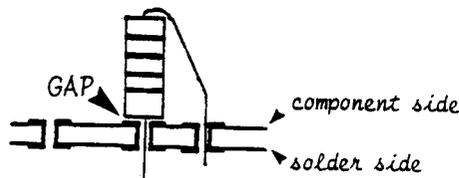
INSTALLING A RESISTOR ON ITS END.
